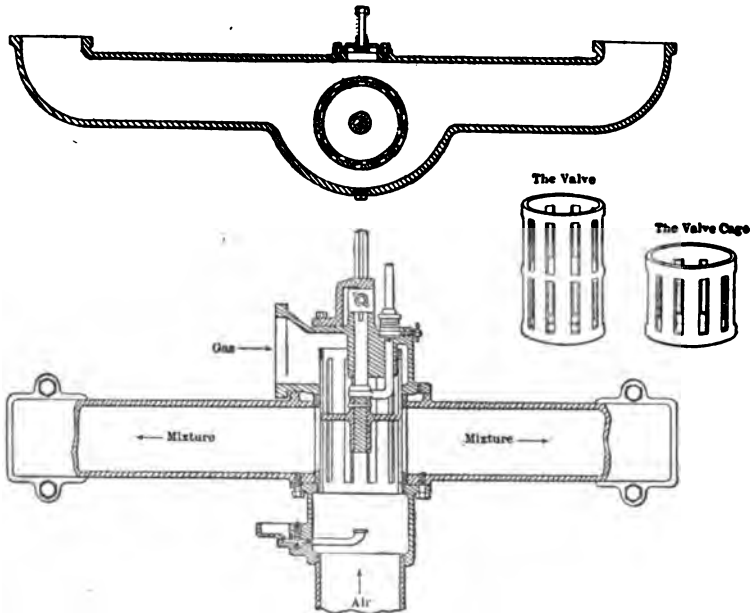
Mixing and Governing Arrangements Buffalo Engine.
